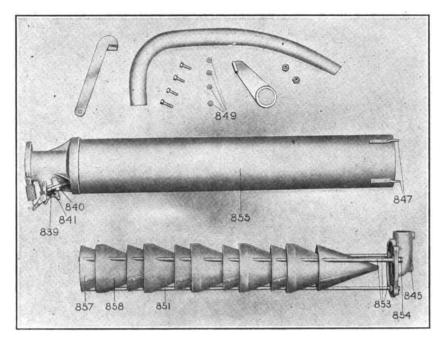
THE MUFFLER AND HOW IT IS DISSEMBLED
